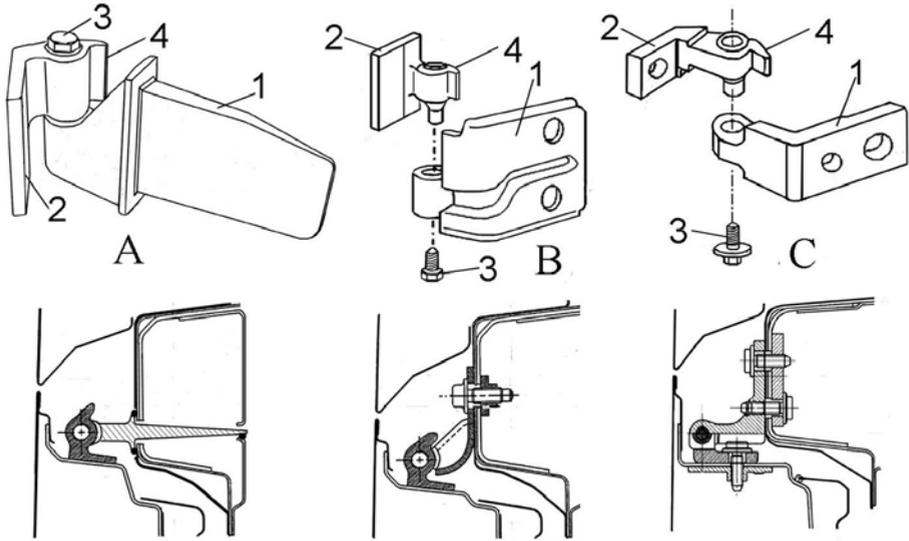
Usual hinge families and fitting sections: 1) movable half hinge; 2) fixed half hinge; 3) pin retaining screw; 4) end stop tooth.
